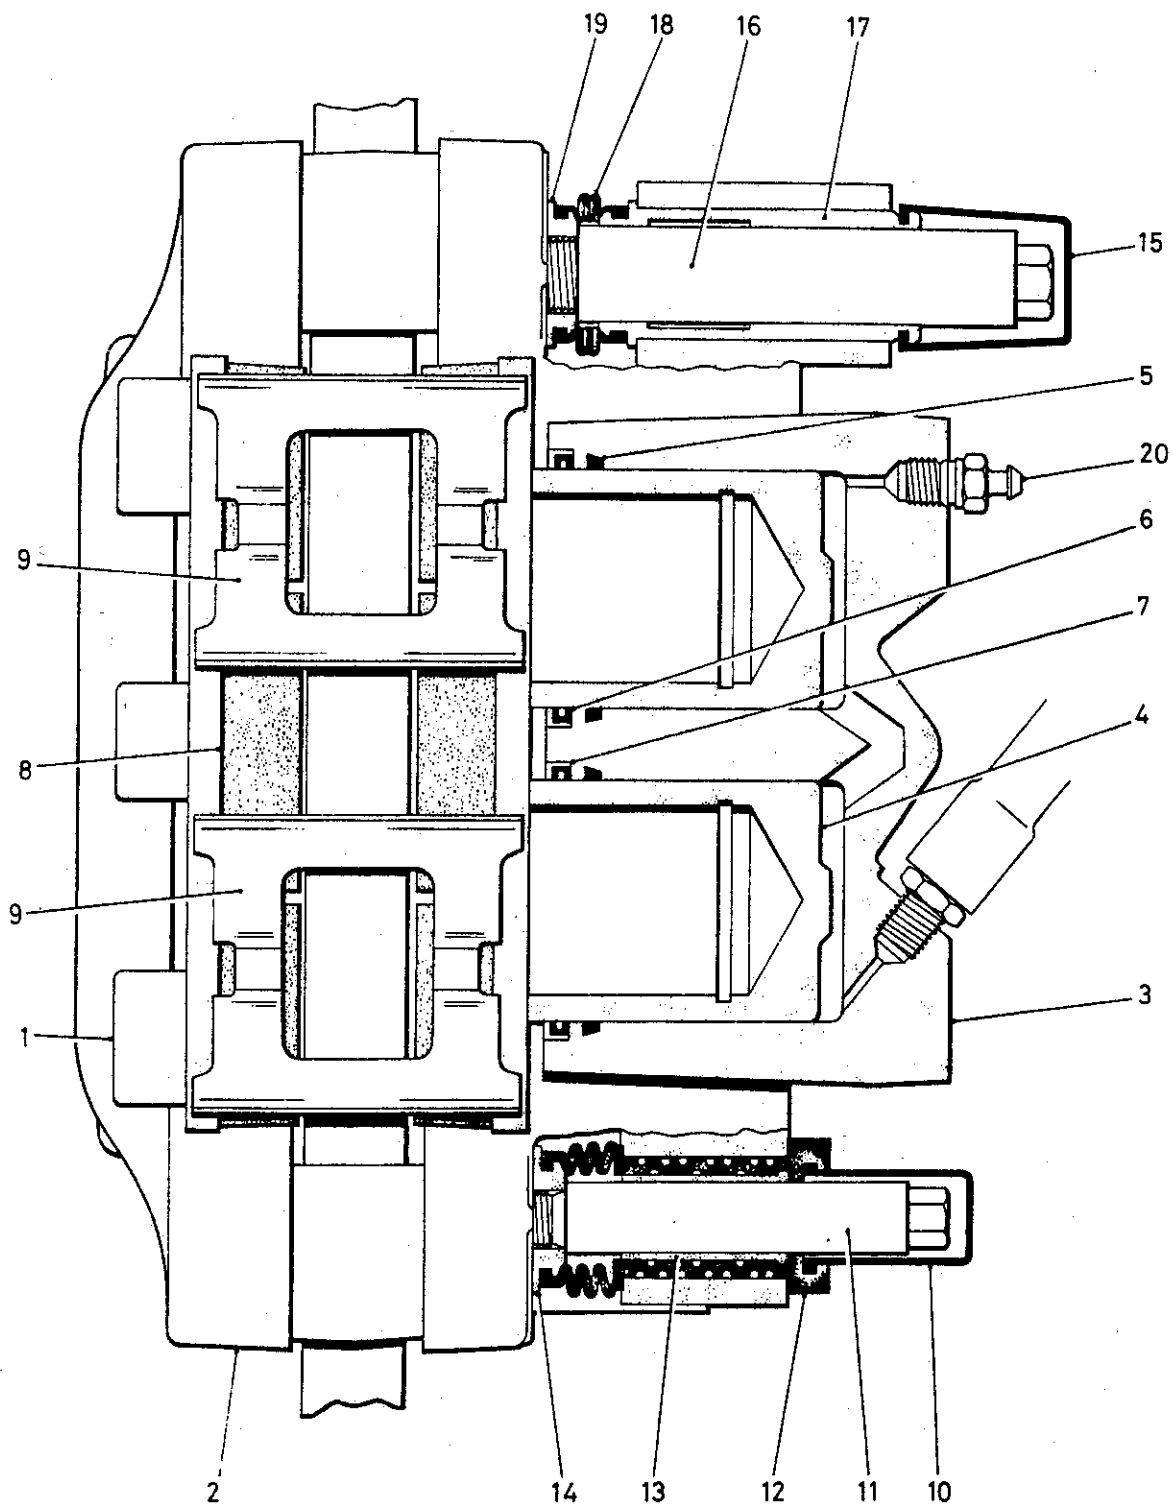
Exploded view of 2 x 50 pin slider caliper assembly
